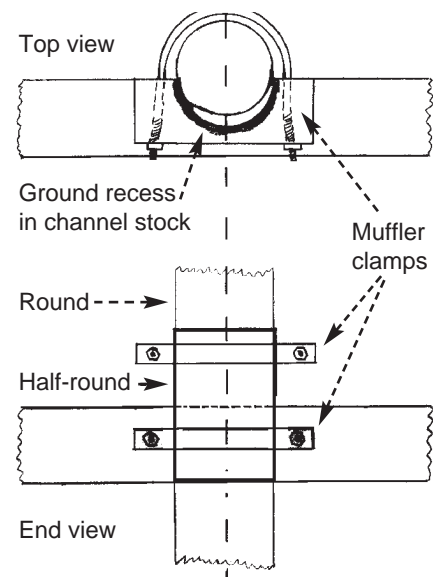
Muffler clamps hold settings to determine thickness of boards.
